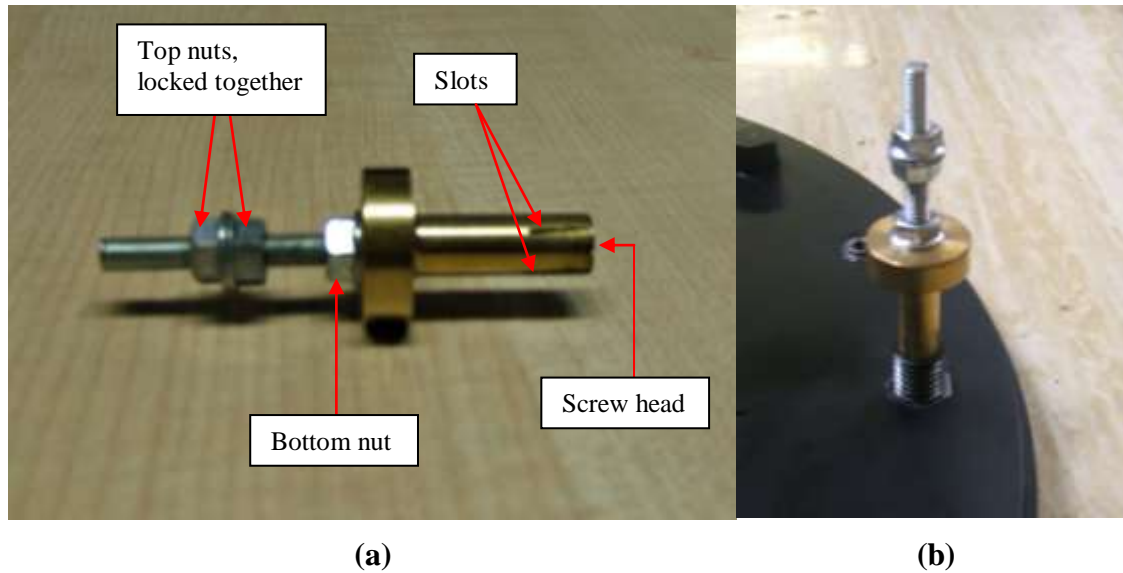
Pictures showing (a) Tool for inserting the surface cavity insert into the disc, (b) Tool positioning the insert into the disc.
